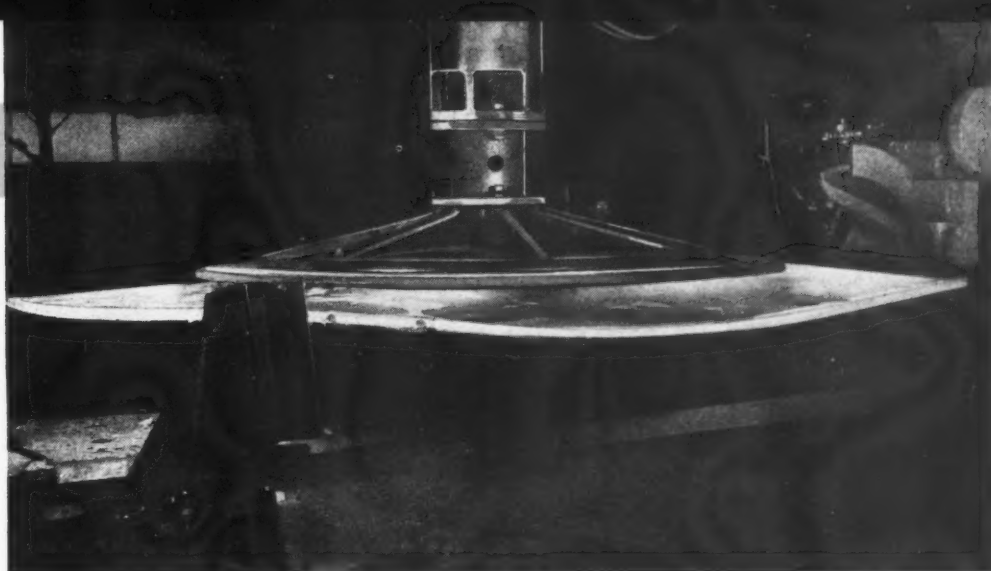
Second Spinning Operation, in which the Outer Roller is Manipulated to Compress the Edge of the Disk to Conform with the Shape of the Inner Roller
